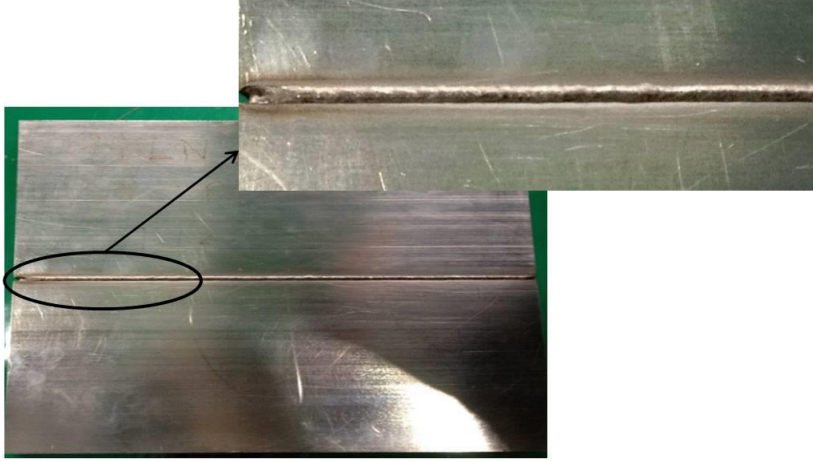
The weld surface appearance after the cosmetic welding
